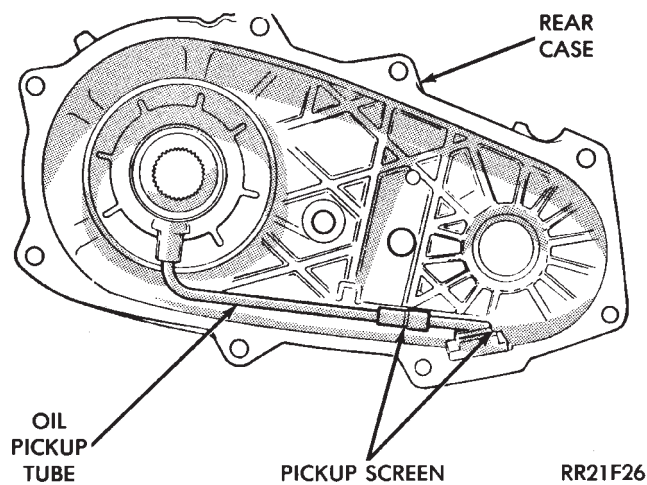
Pickup Tube, Oil Screen And Pump Installation
